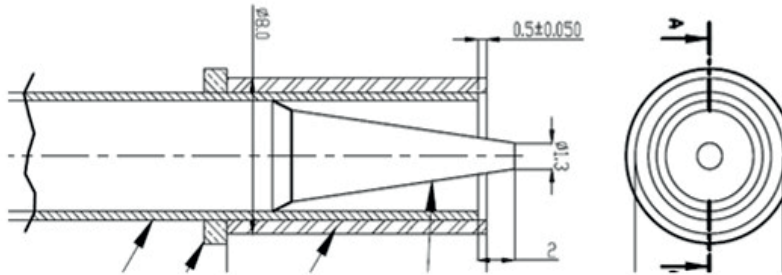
End plug (SS316LN/T91)-Clad tube (D9/T91/ODS)-Driver (Copper)-Ring (Delrin) assembly adopted in magnetic pulse end cap sealing.
